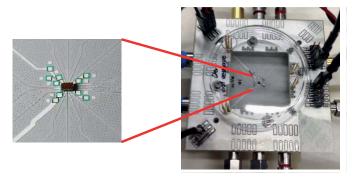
Left: chip is flip-chip mounted on the LCP PCB. Right: LCP is packaged in a rigid metallic frame.
